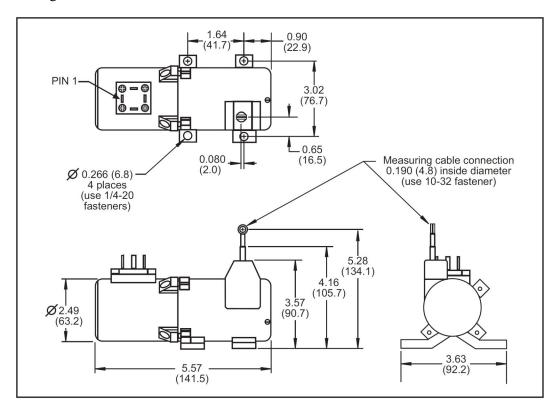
Cable Extension Position Transducer: Mounting Dimensions
